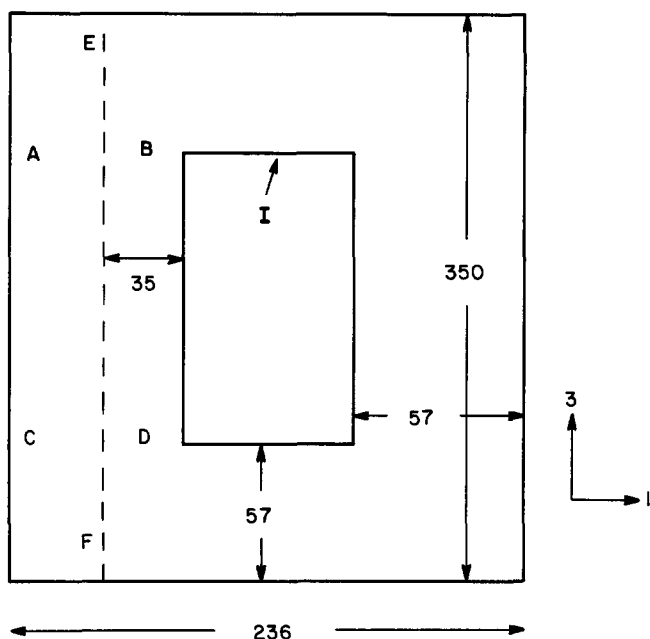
Dimensions (mm) of injection moulded plaques. Injection point is at I
